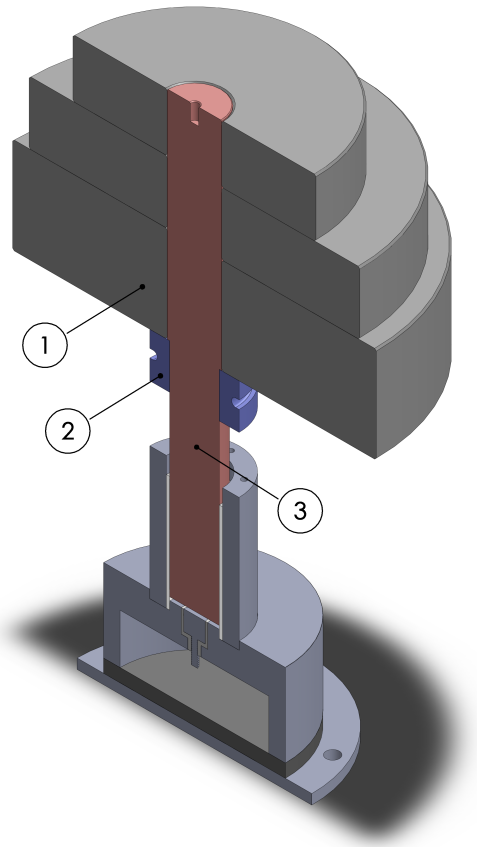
Section view of the new measurement setup, 1. weights, 2. locking ring, 3. electrode.
